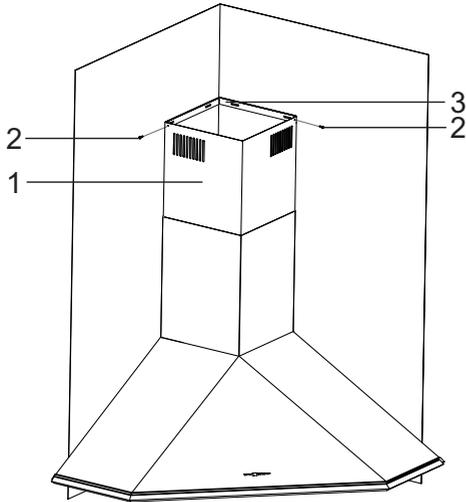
ASSEMBLY OF SHEET METAL FLUES
